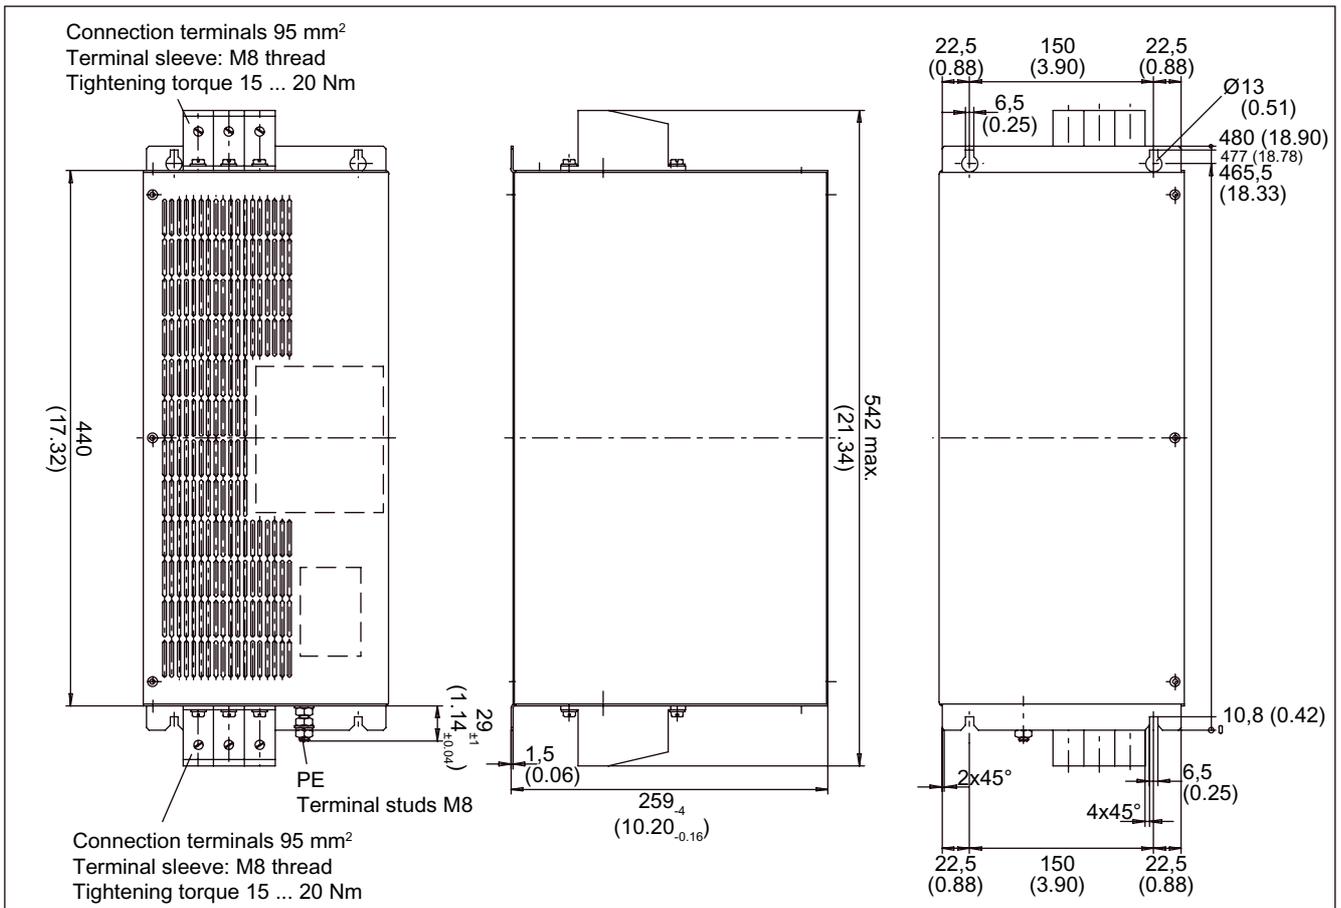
Dimension drawing of Wideband Line Filter 80 kW for Active Lines Modules, all dimensions in mm and (inches)
